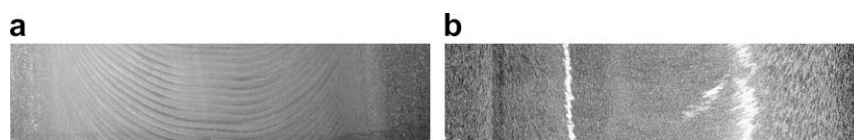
Horizontal cross-sections of the welds CW (a) and HW (b).
